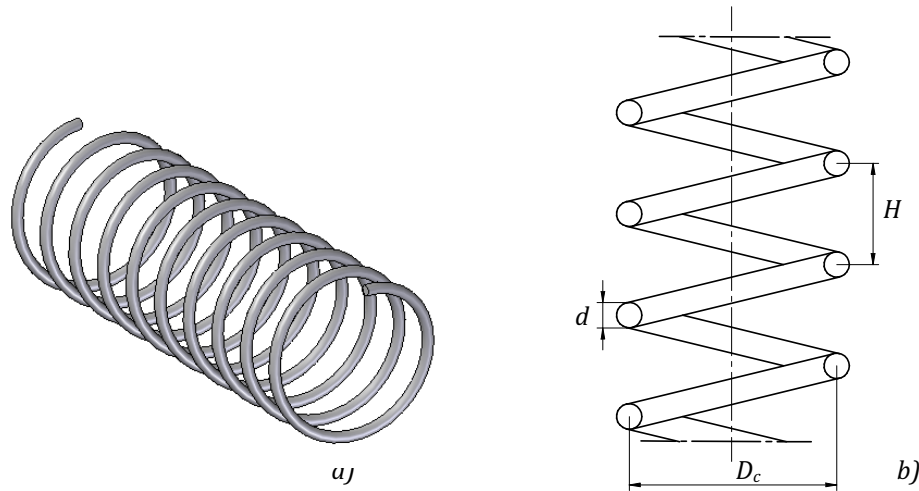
Helically coiled tube: a) 3D view, b) Plain view with geometrical parameters
